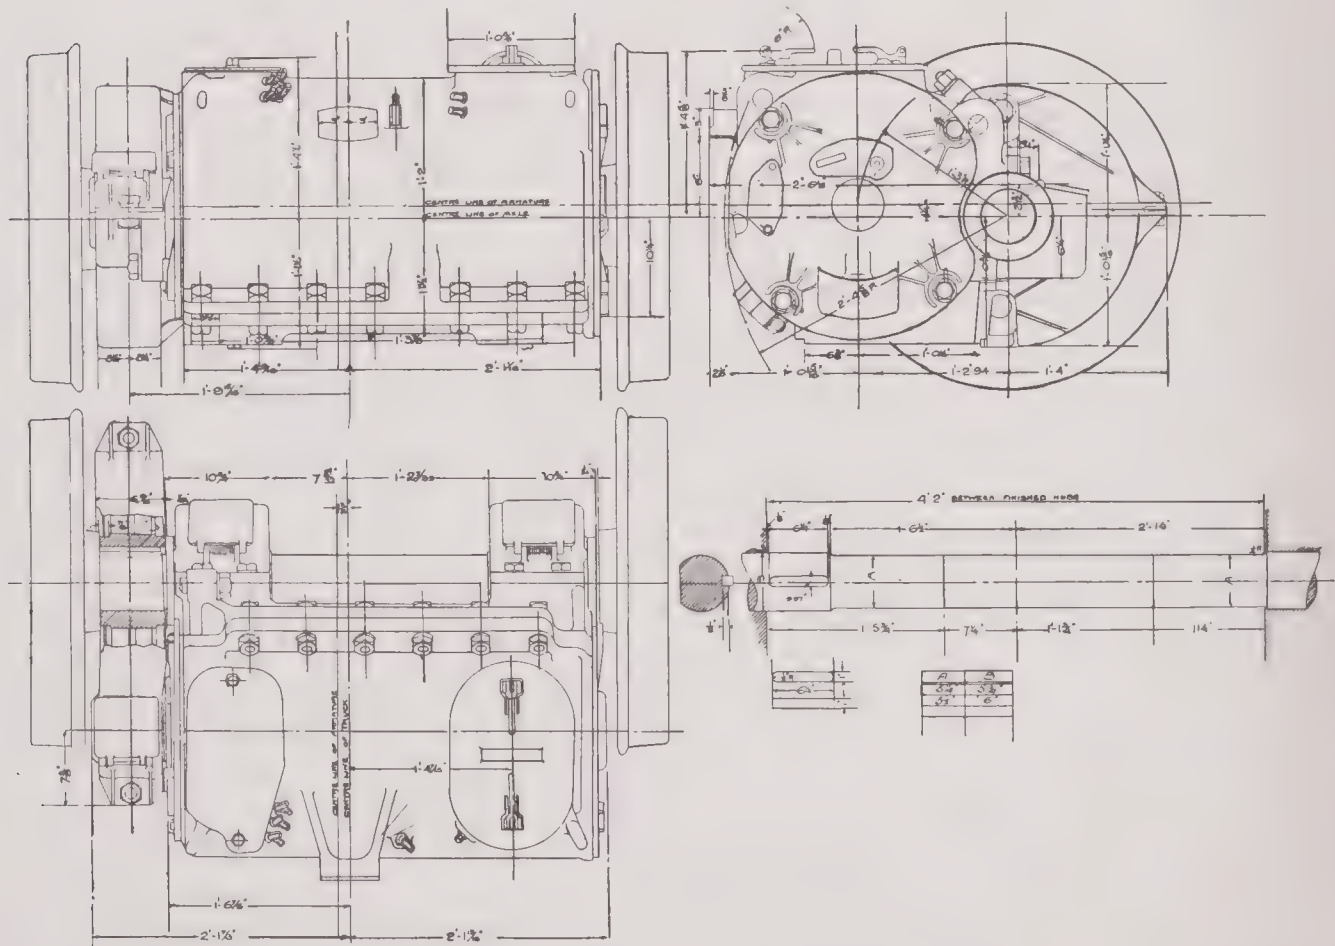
ASSEMBLY DRAWING GIVING THE MAIN DIMENSIONS OF BRITISH THOMSON-HOUSTON Co.'s 75 H.-P. SINGLE-PHASE COMPENSATED-SERIES TYPE RAILWAY MOTOR.
